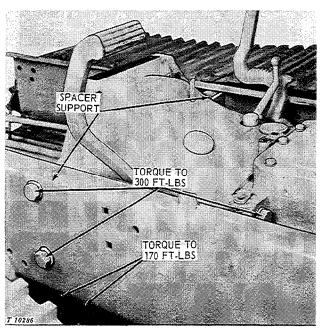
Torquing Clutch Housing Attaching Cap Screws
